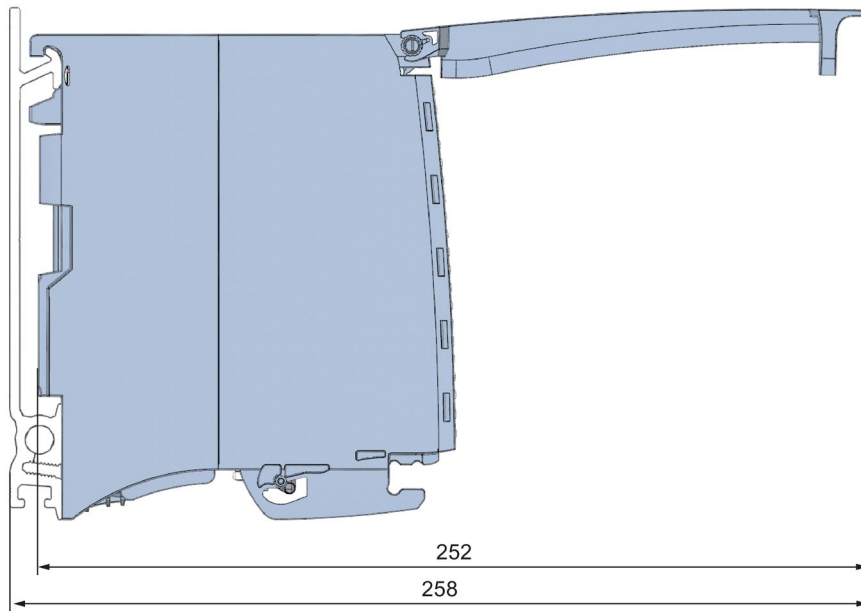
Dimension drawing of the DI 16x24...125VUC HF module, side view with open front cover
